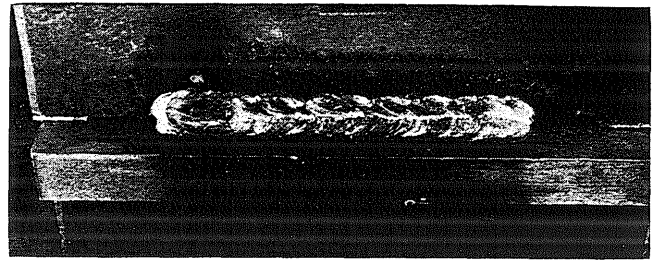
Results of fatigue tests of tee fillet-welded joints welded with E7016
